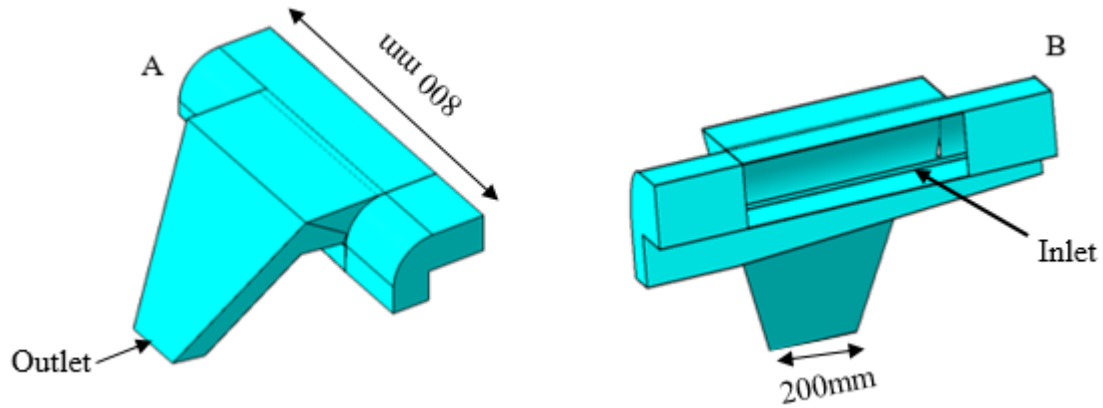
Chaff outlet A) rear isometric view and B) front isometric view
